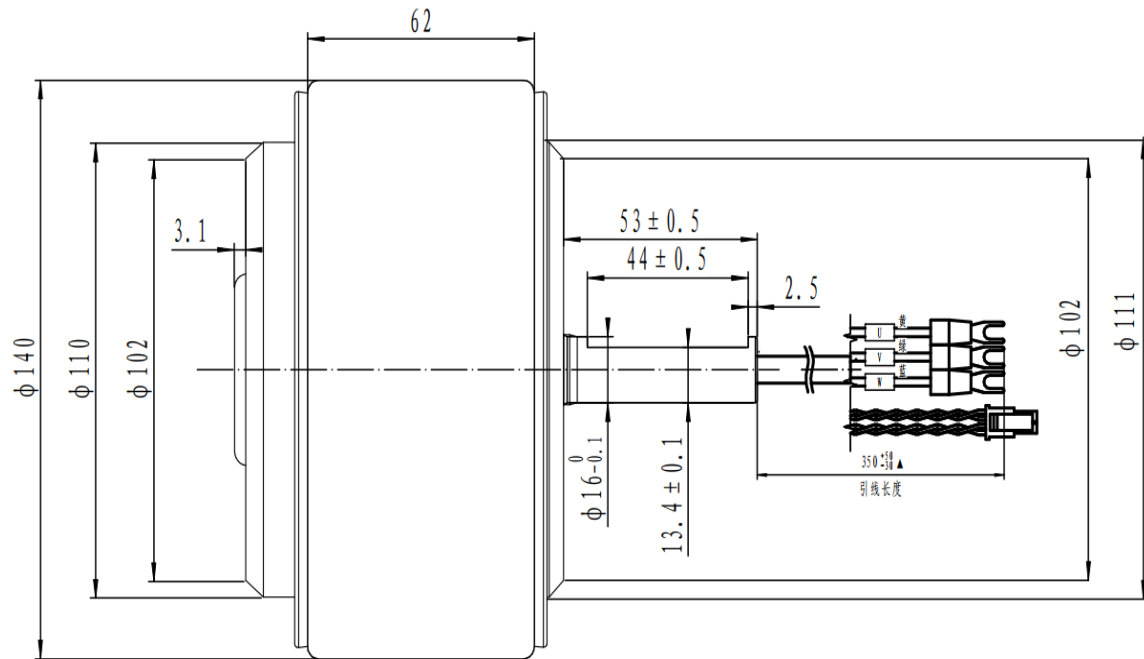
5.5 inch 15Nm hub motor mounting size
